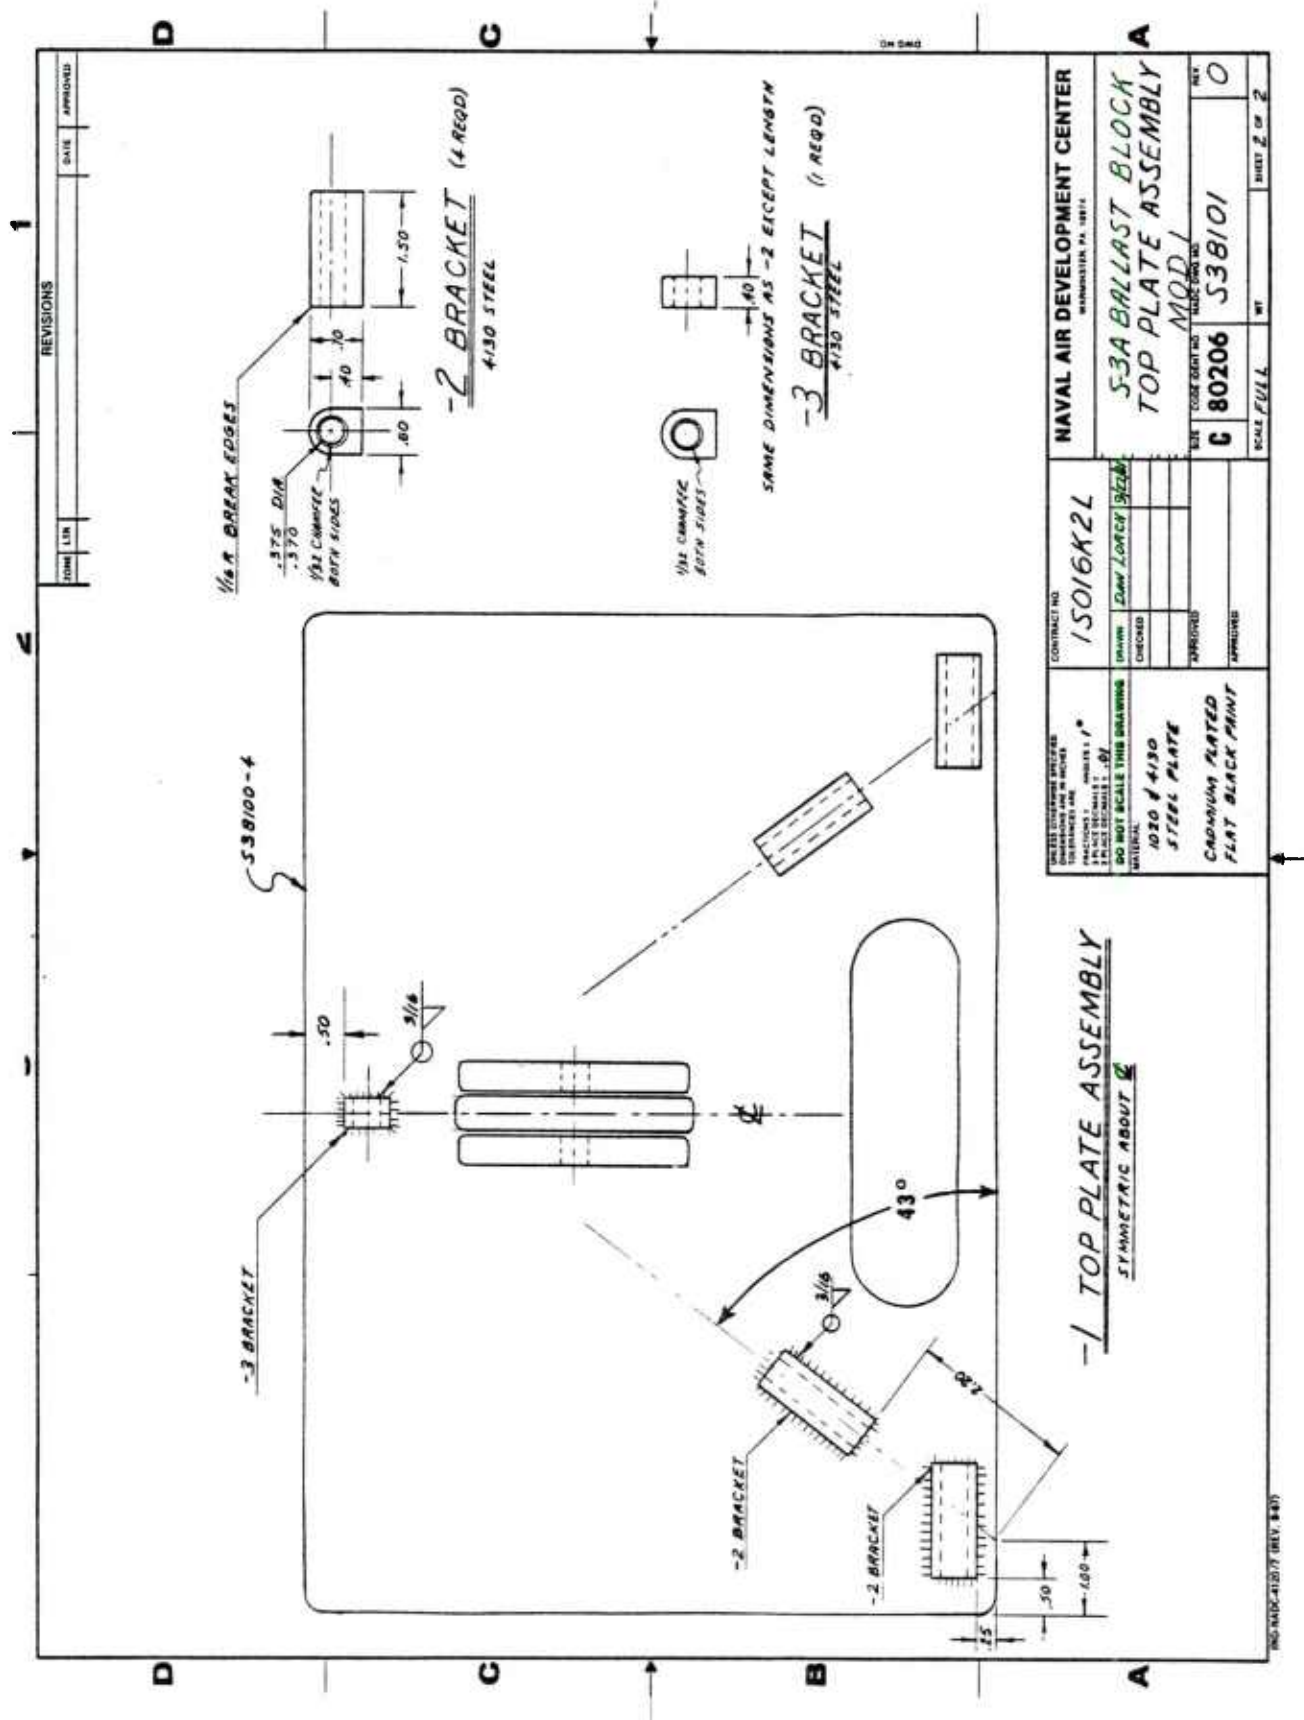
S-3A Ballast Block Top Plate Assembly Mod 1
